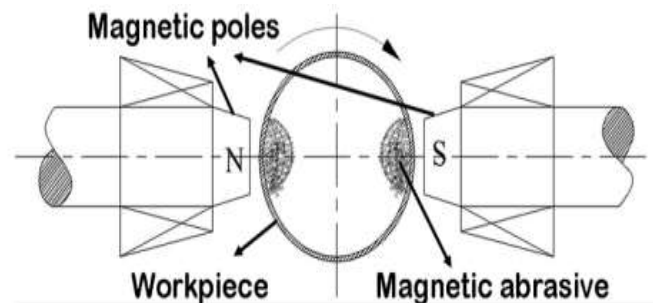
Schematic view of the internal magnetically assisted abrasive finishing principle [15]
